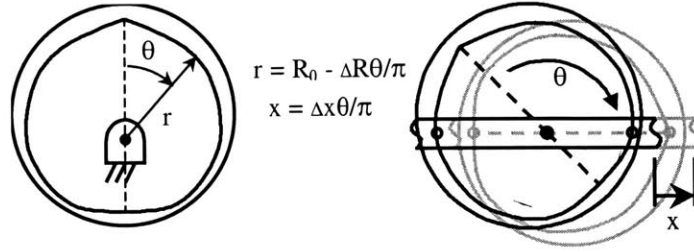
Details of fine positioning cam geometry. Pins on TeMPeST 1-D shaft follow cam in disk mounted to Mediflex arm. In this configuration, clockwise rotation about the axis generates linear motion of the shaft towards the right.
